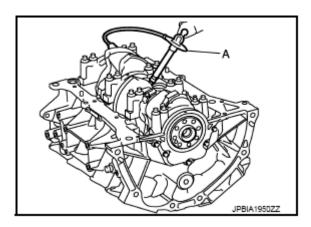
Measuring Connecting Rod Bolt Tightening Angle Using Angle Wrench Courtesy of NISSAN NORTH AMERICA, INC.
